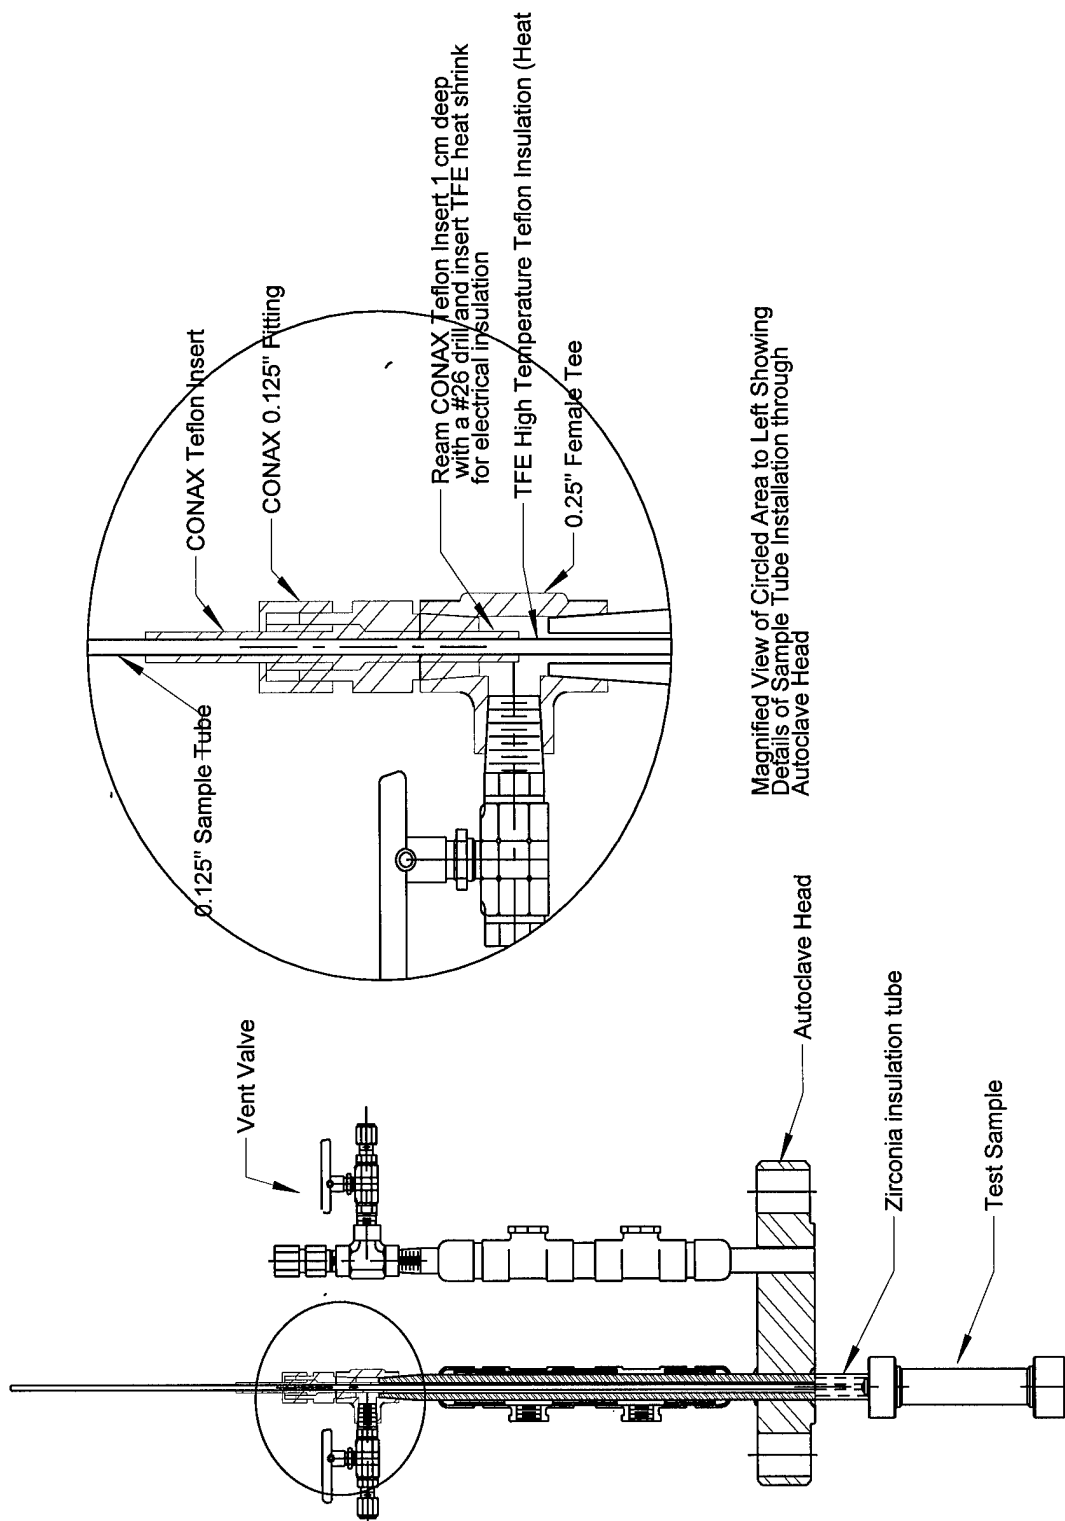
Autoclave Head and Sample Assembly Detail
